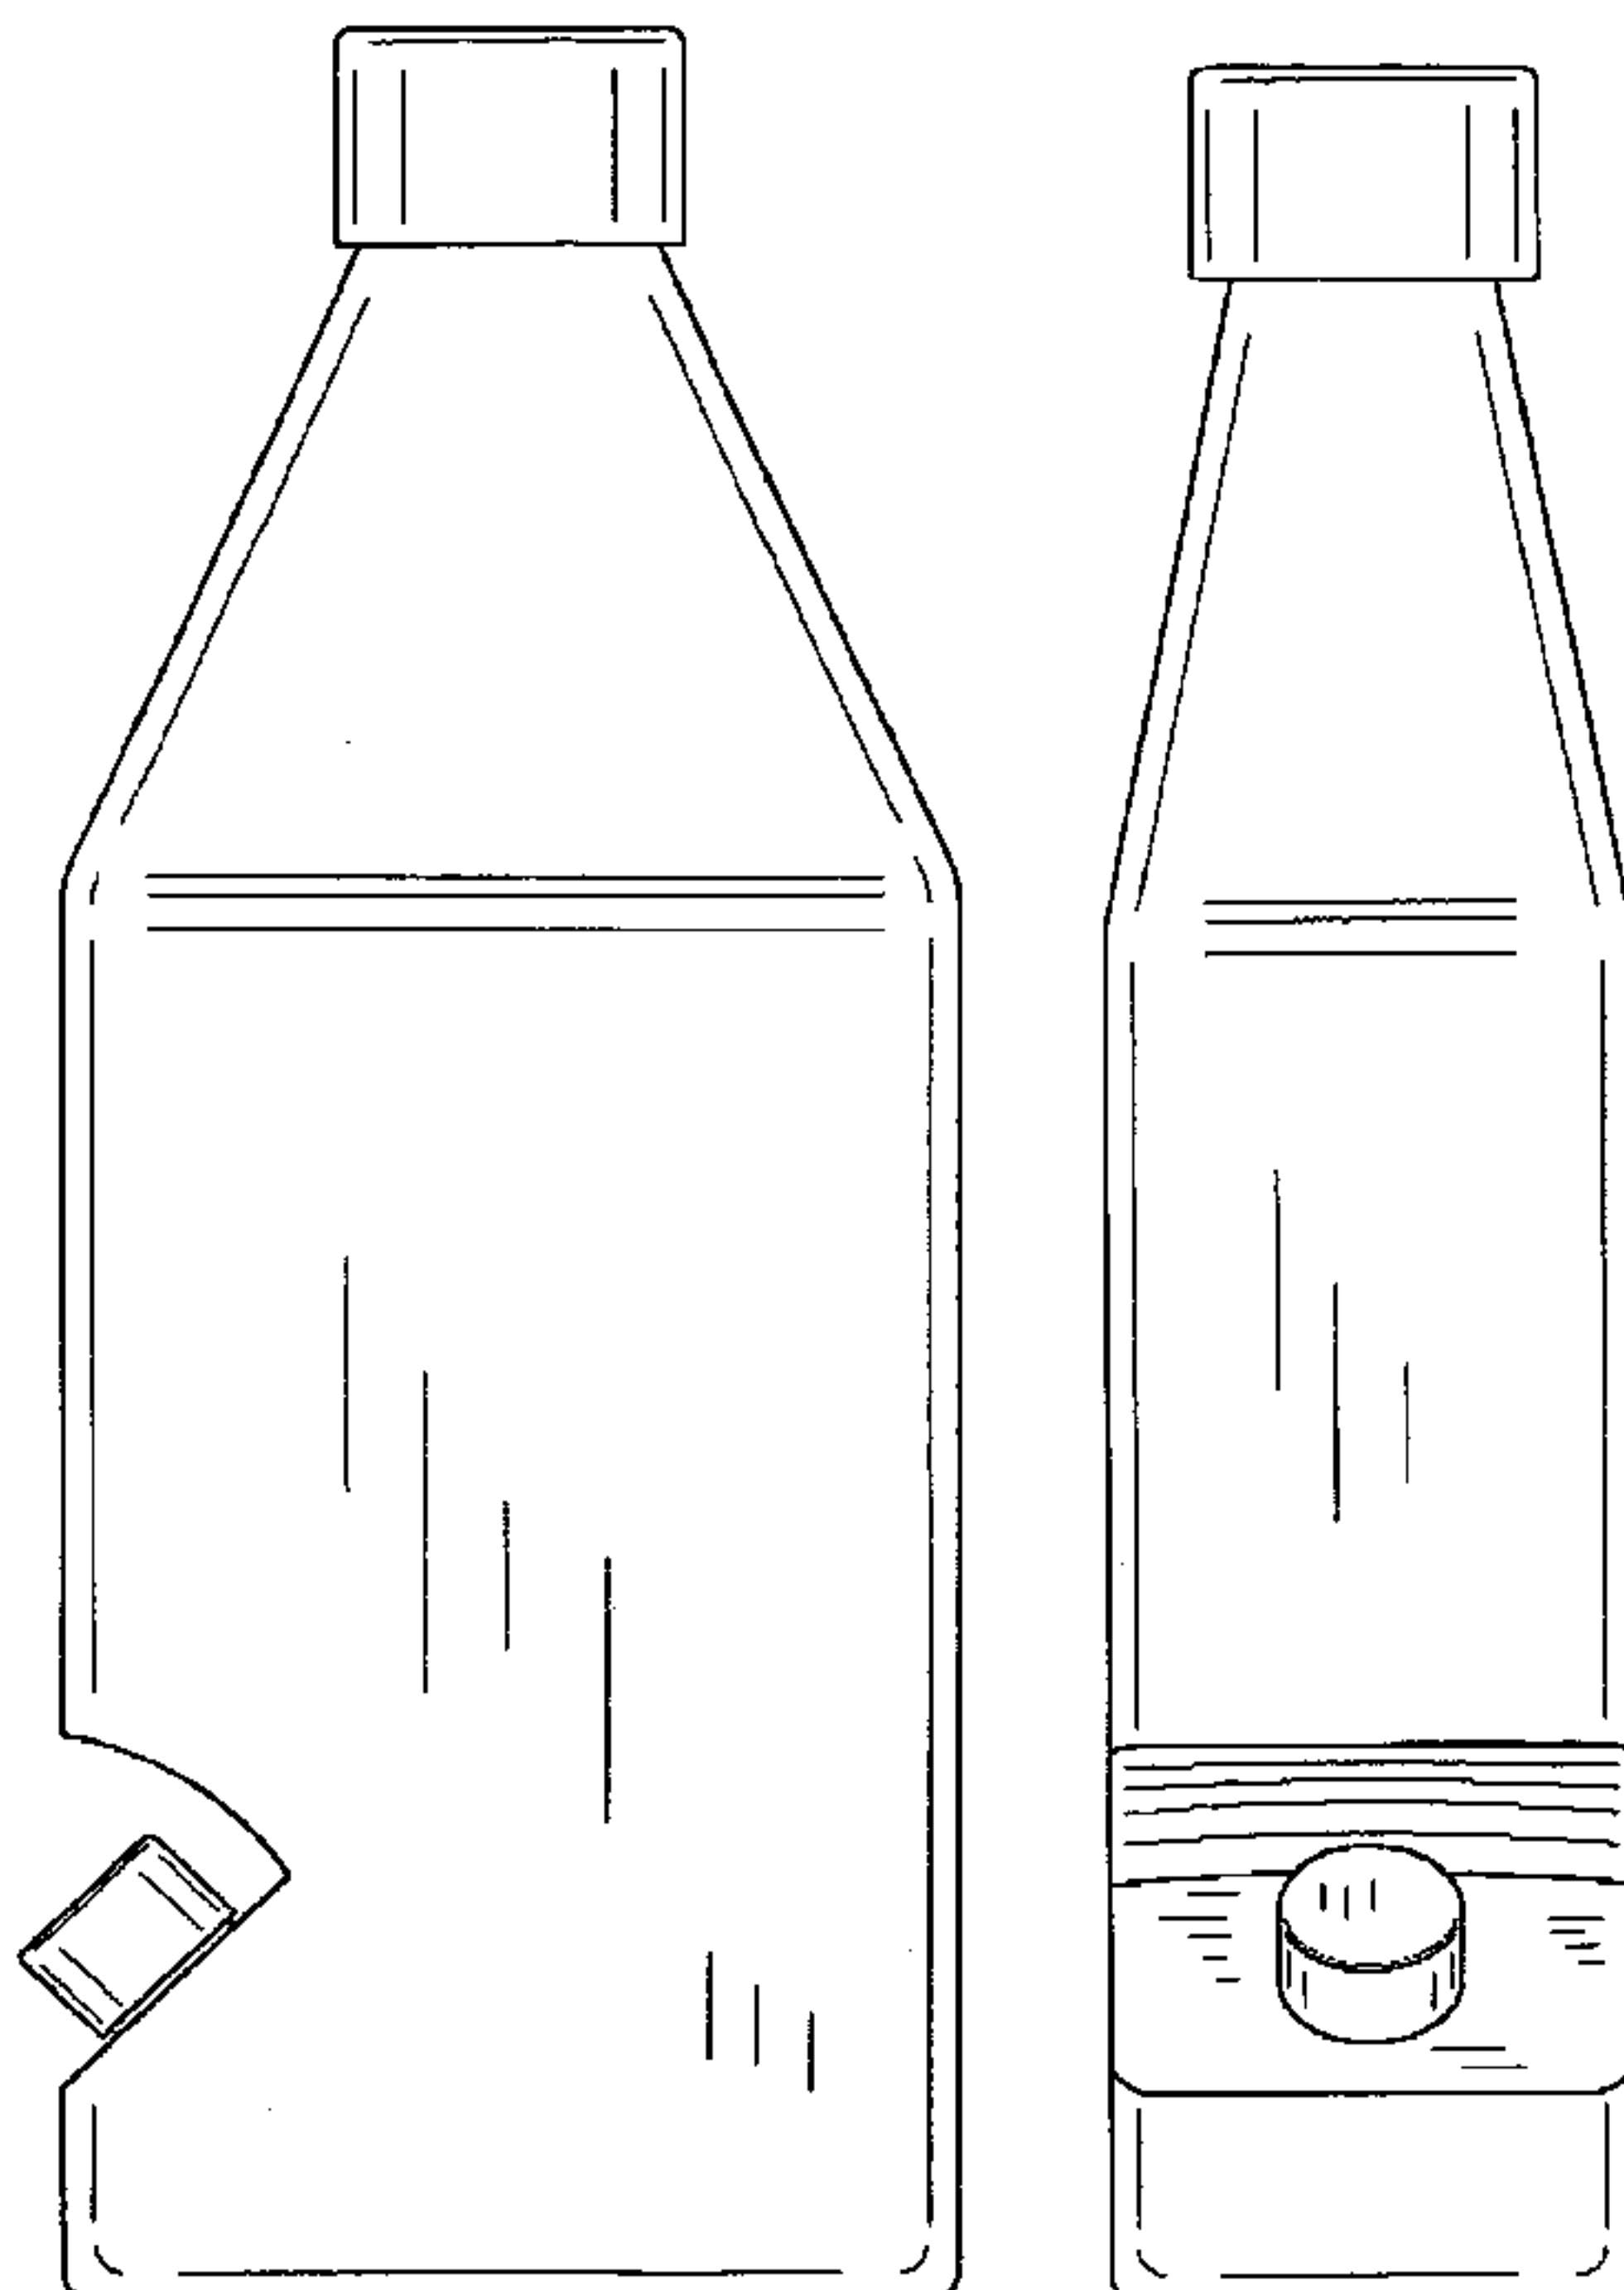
is a left-side elevational view of the bottle with top and bottom openings thereof;
